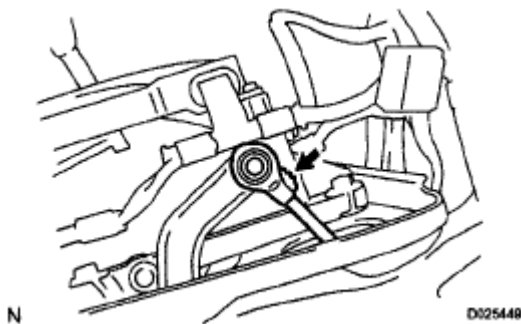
Locating Cable End From Rod Of Floor Shift Assembly
